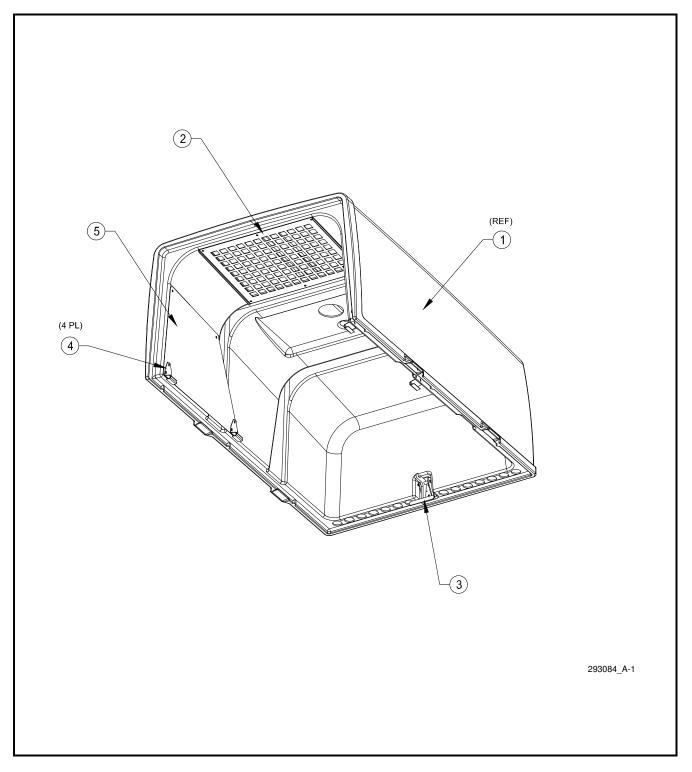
Display Controller Assembly, 4400 (Sheet 1 of 2).
